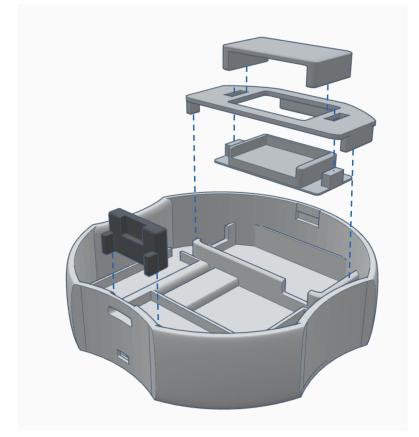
Screenshot showing how the various printed parts fit in the final case for the prototype
